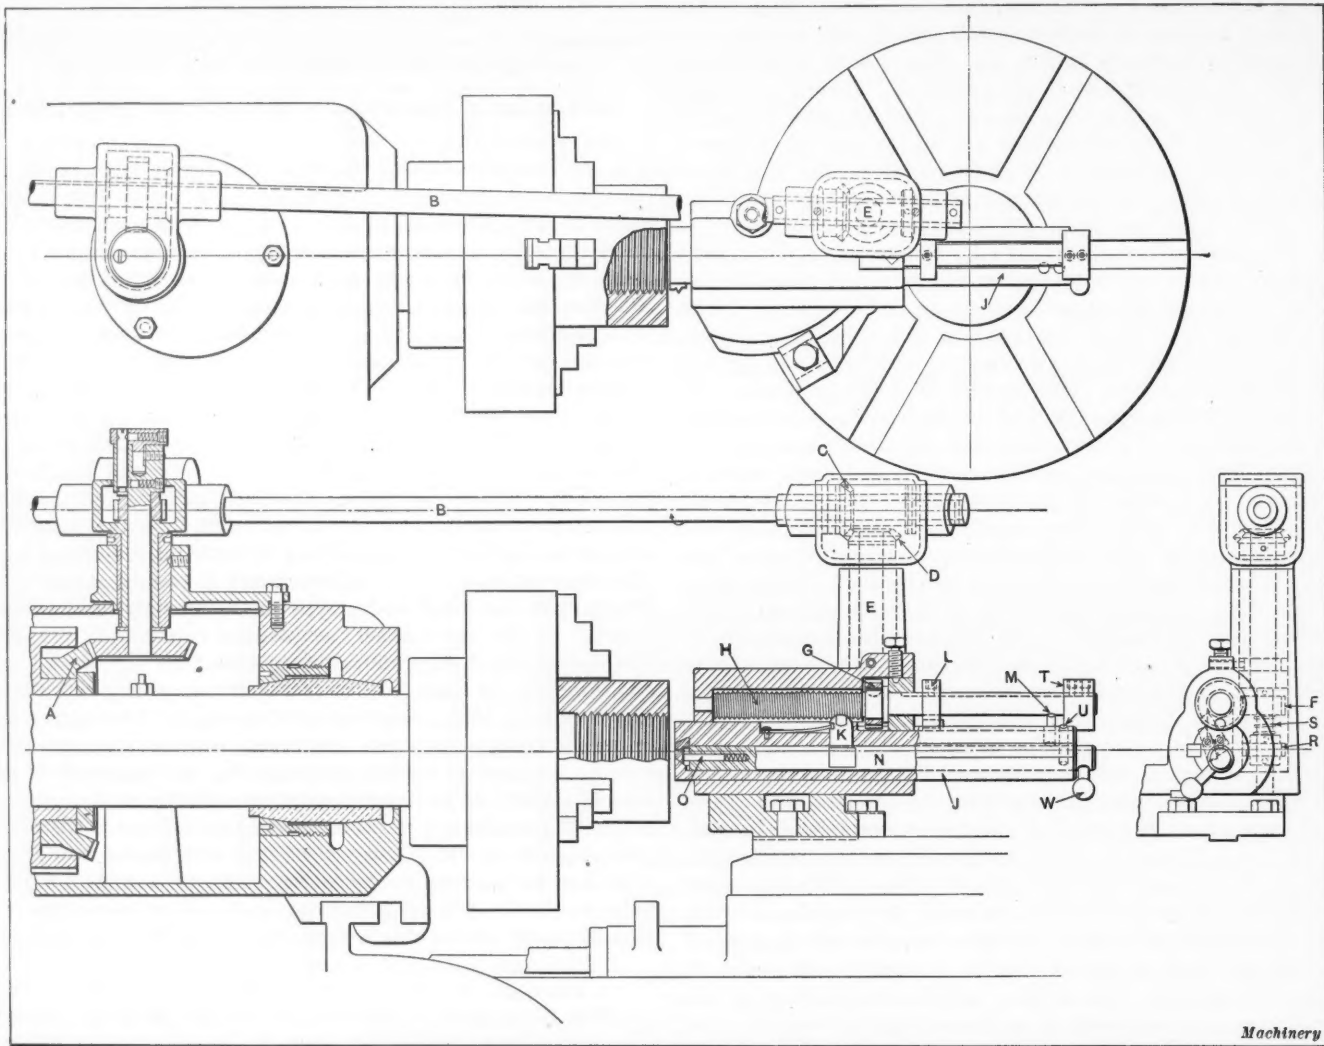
Thread-chasing Attachment of Hartness Flat Turret Lathe
